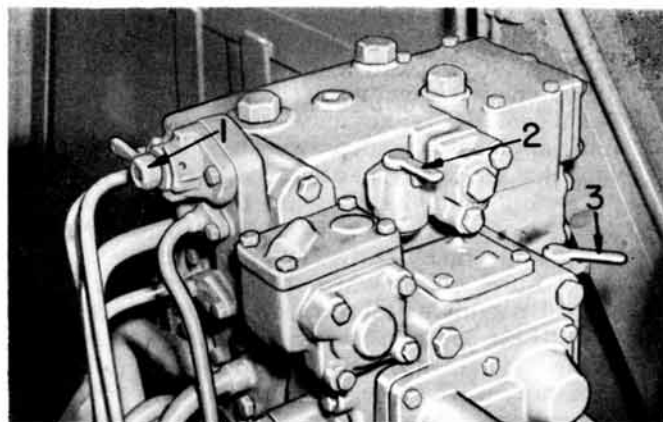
D-24 CONTROL VALVE "B" UNIT
